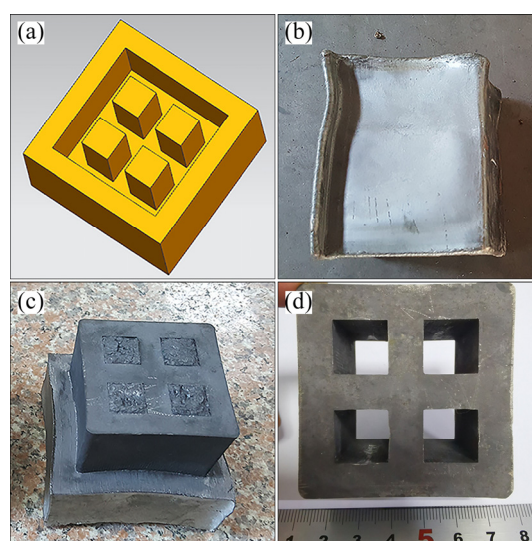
Powder metallurgy Ti–45Al–7Nb–0.3W near net shape mold core model (a), HIPed specimen with steel package (b), photograph of specimen after removing package (c) and final near net shaped part (d)
